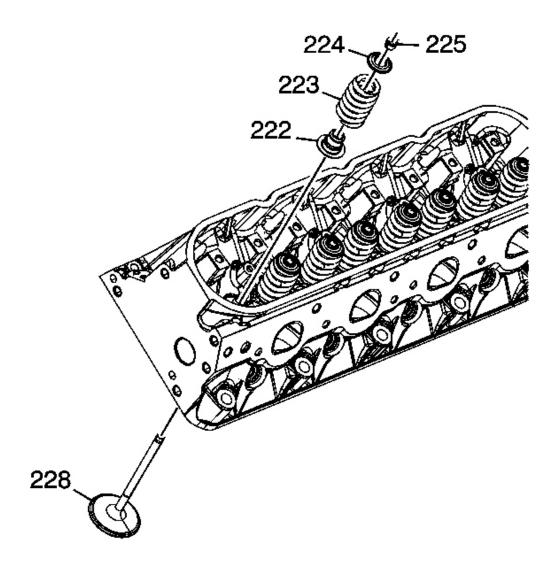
Valve Stem Keys, Valve Spring Cap & Valve Spring Courtesy of GENERAL MOTORS CORP.
